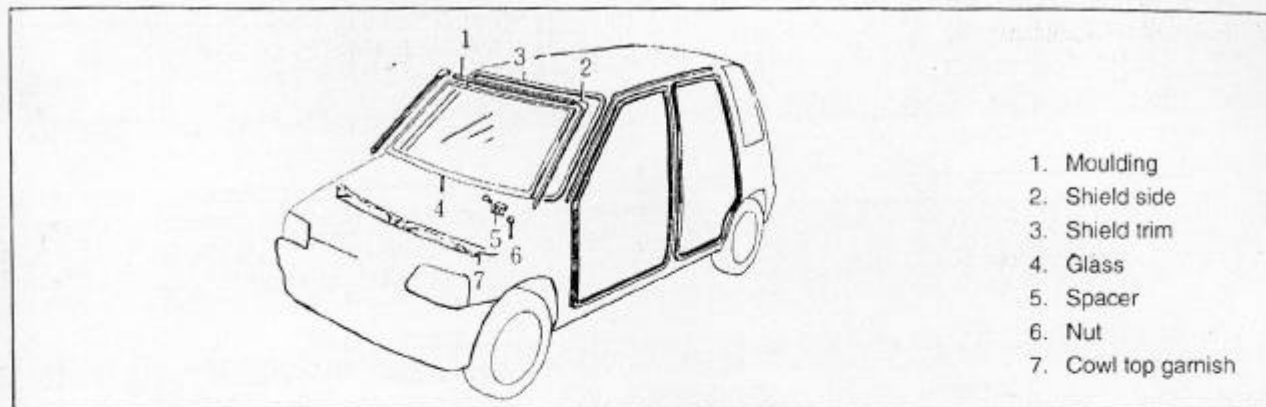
20 FRONT WINDOW GLASS INSTALLATION
